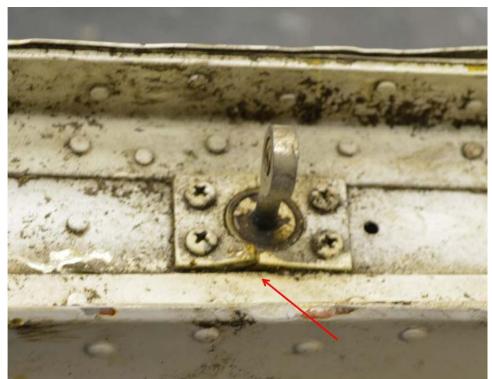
The rod end bearing. The bolt was missing and the actuator was fully retracted to the ANU trim position. The only damage noted to the actuator attach hardware was the cracked doubler (see arrow).
